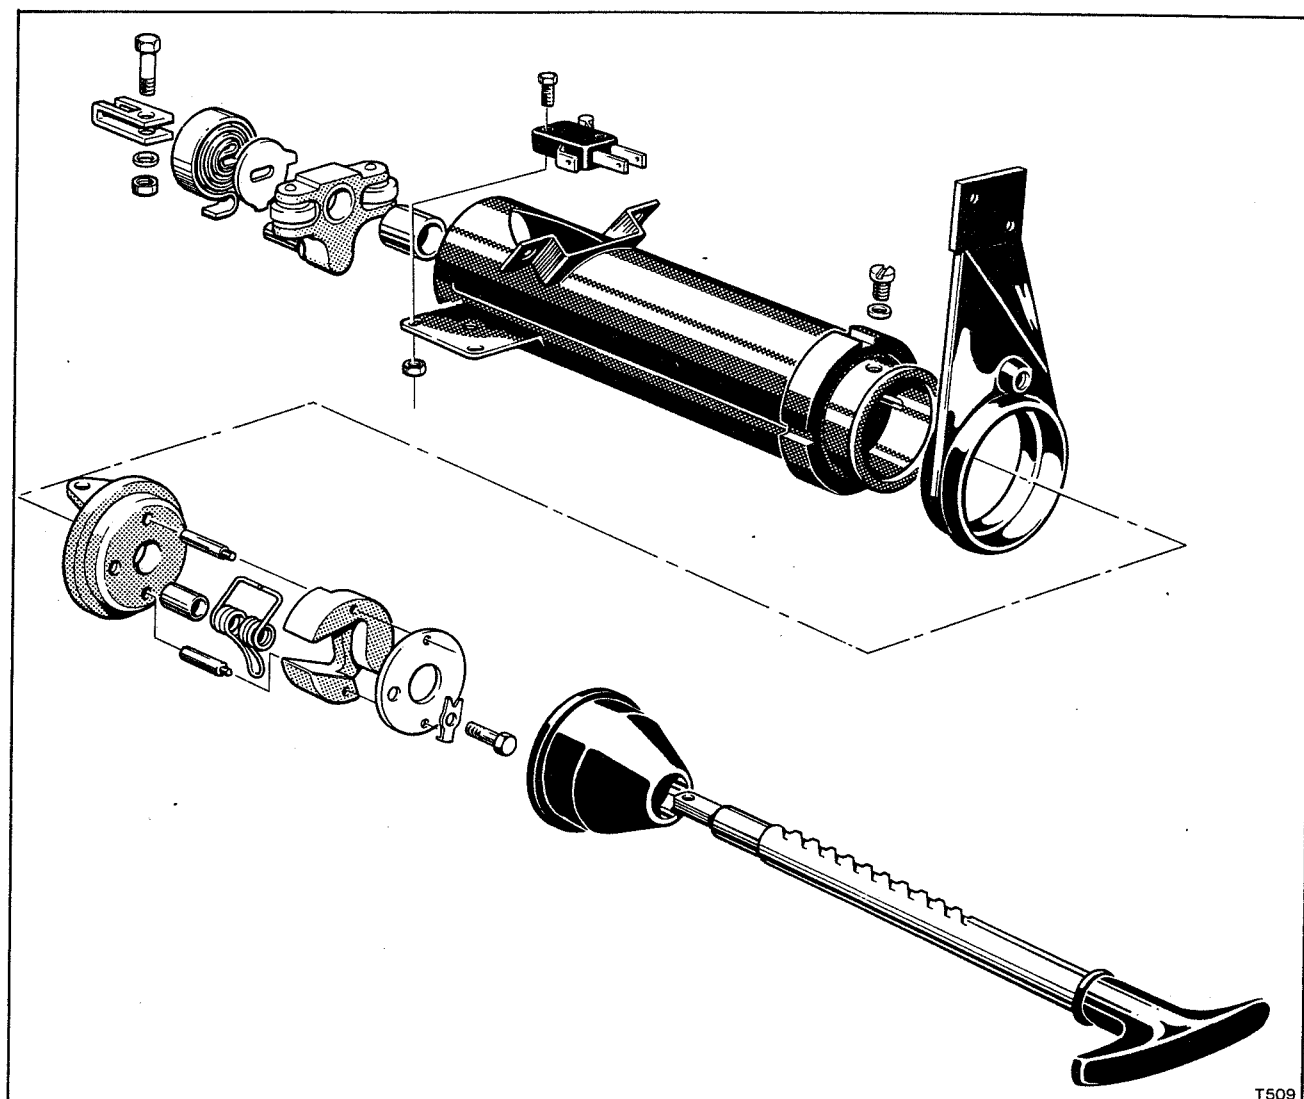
Parking brake ratchet assembly (Right-hand drive cars)
